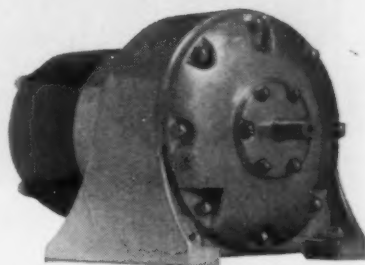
Original Construction of gear motor housing. Required 90% more machining. Weighed 175% more than welded steel.
